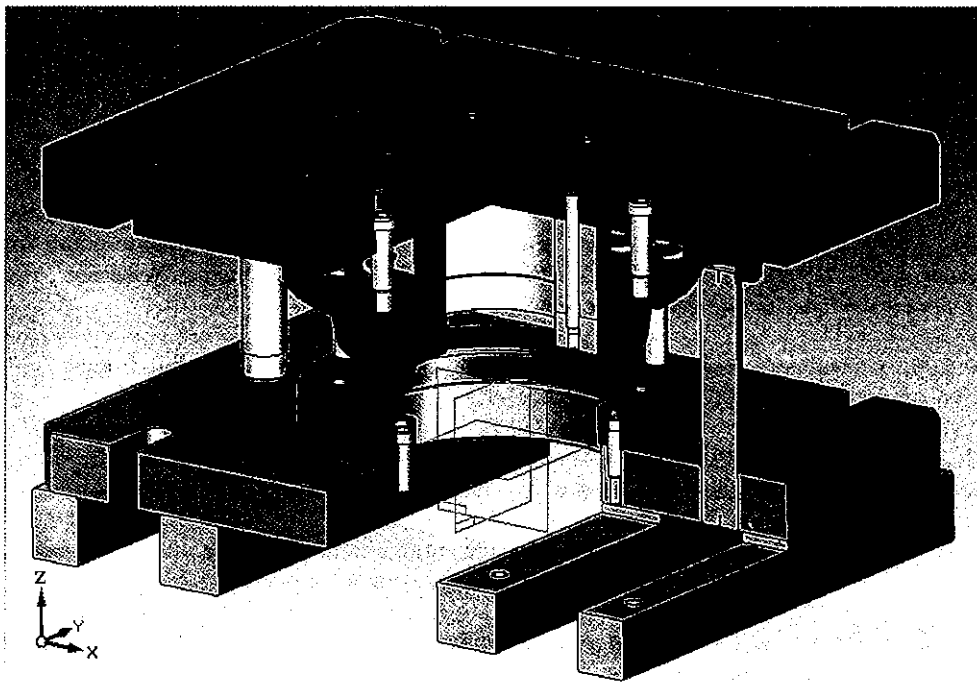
Stamping tool for cutting and dimpling sheet metal parts
